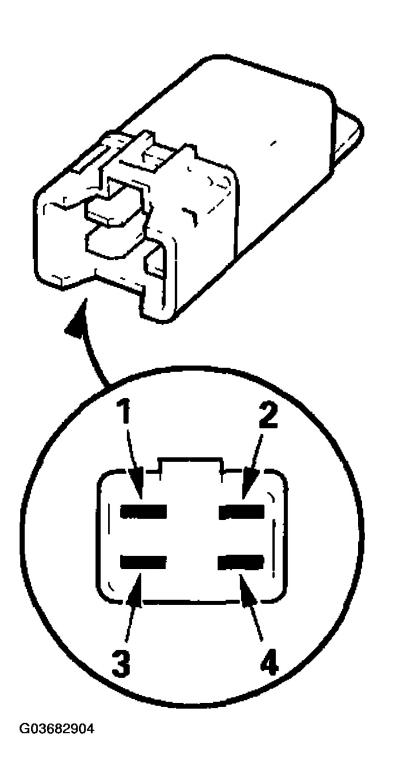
Identifying Blower Motor High Relay Courtesy of AMERICAN HONDA MOTOR CO., INC.
